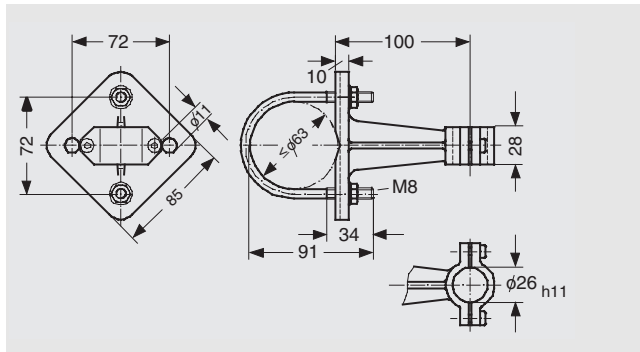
/109 Instrument bracket form A, wall or pipe mounting, dimensions
